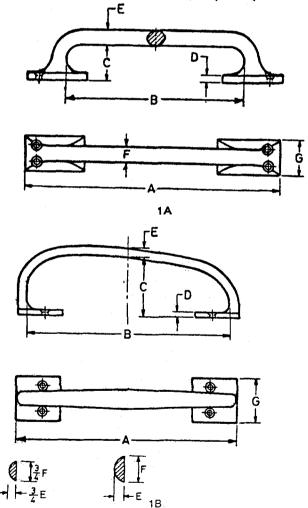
TYPICAL DOOR HANDLE (TYPE 1)
